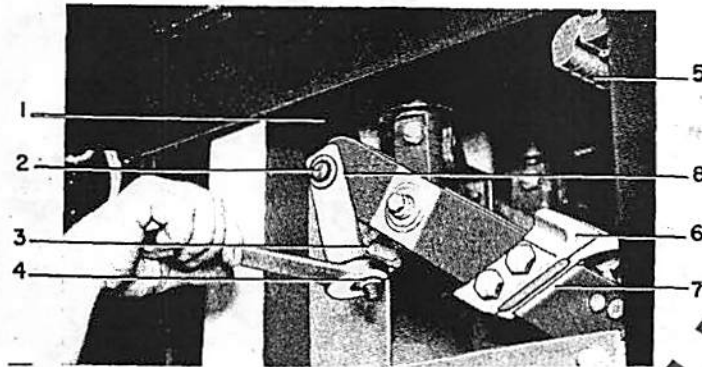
Adjustable Coupling for Making Primary Contact Wipe Adjustments
